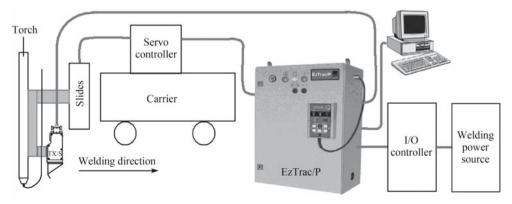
Schematic laser vision sensing based on adaptive welding system
